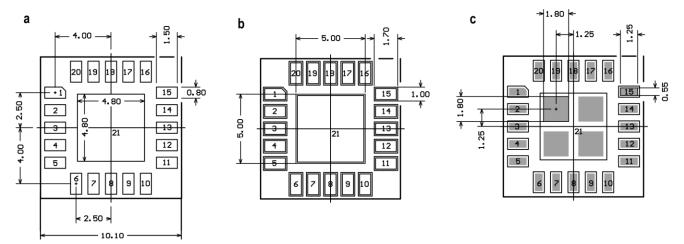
SCD4x footprint (top view): landing pads (a), solder mask (b) and solder paste (c). Dimensions given in millimeters.
